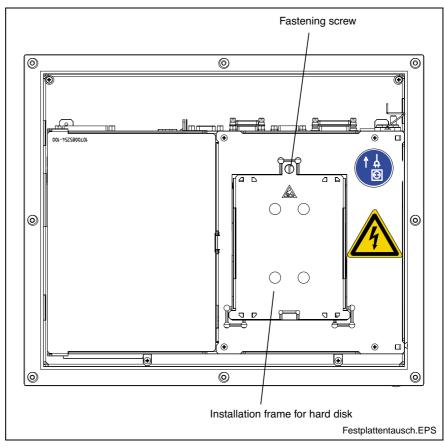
Position of the hard disk's installation frame and the fastening screw
